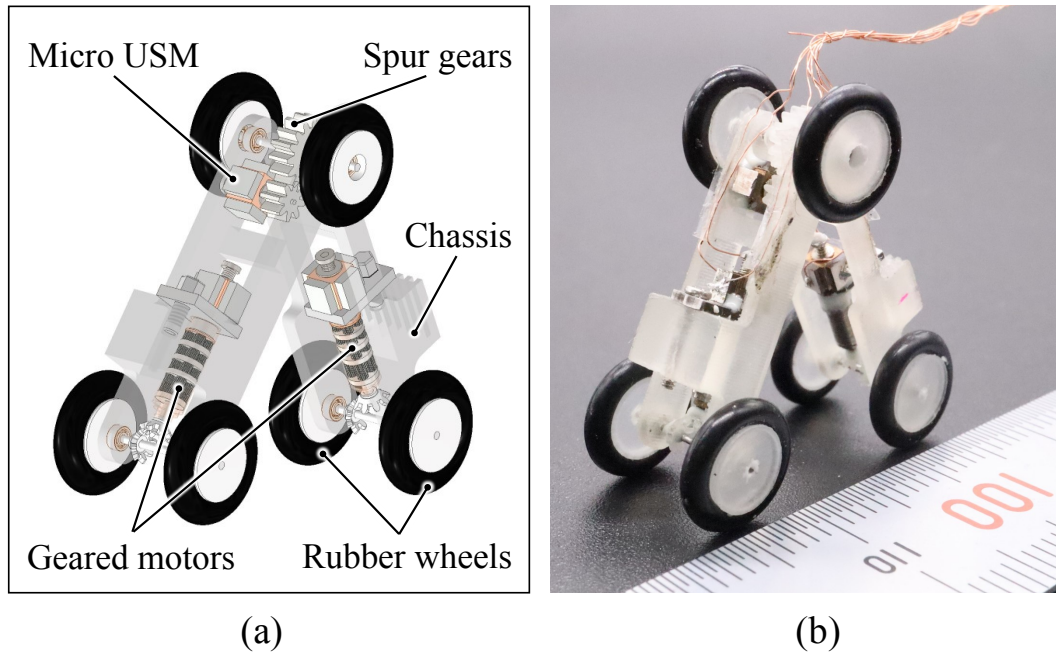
(a) CAD design of the insect-scale inspection robot, two micro-g geared motors drive the front and rear wheels using bevel gears. Another micro-motor is controlling the resistance of the pivot joint, and it is connected to the joint using 2 spur gears. (b) Prototype of the insect-scale inspection robot.
